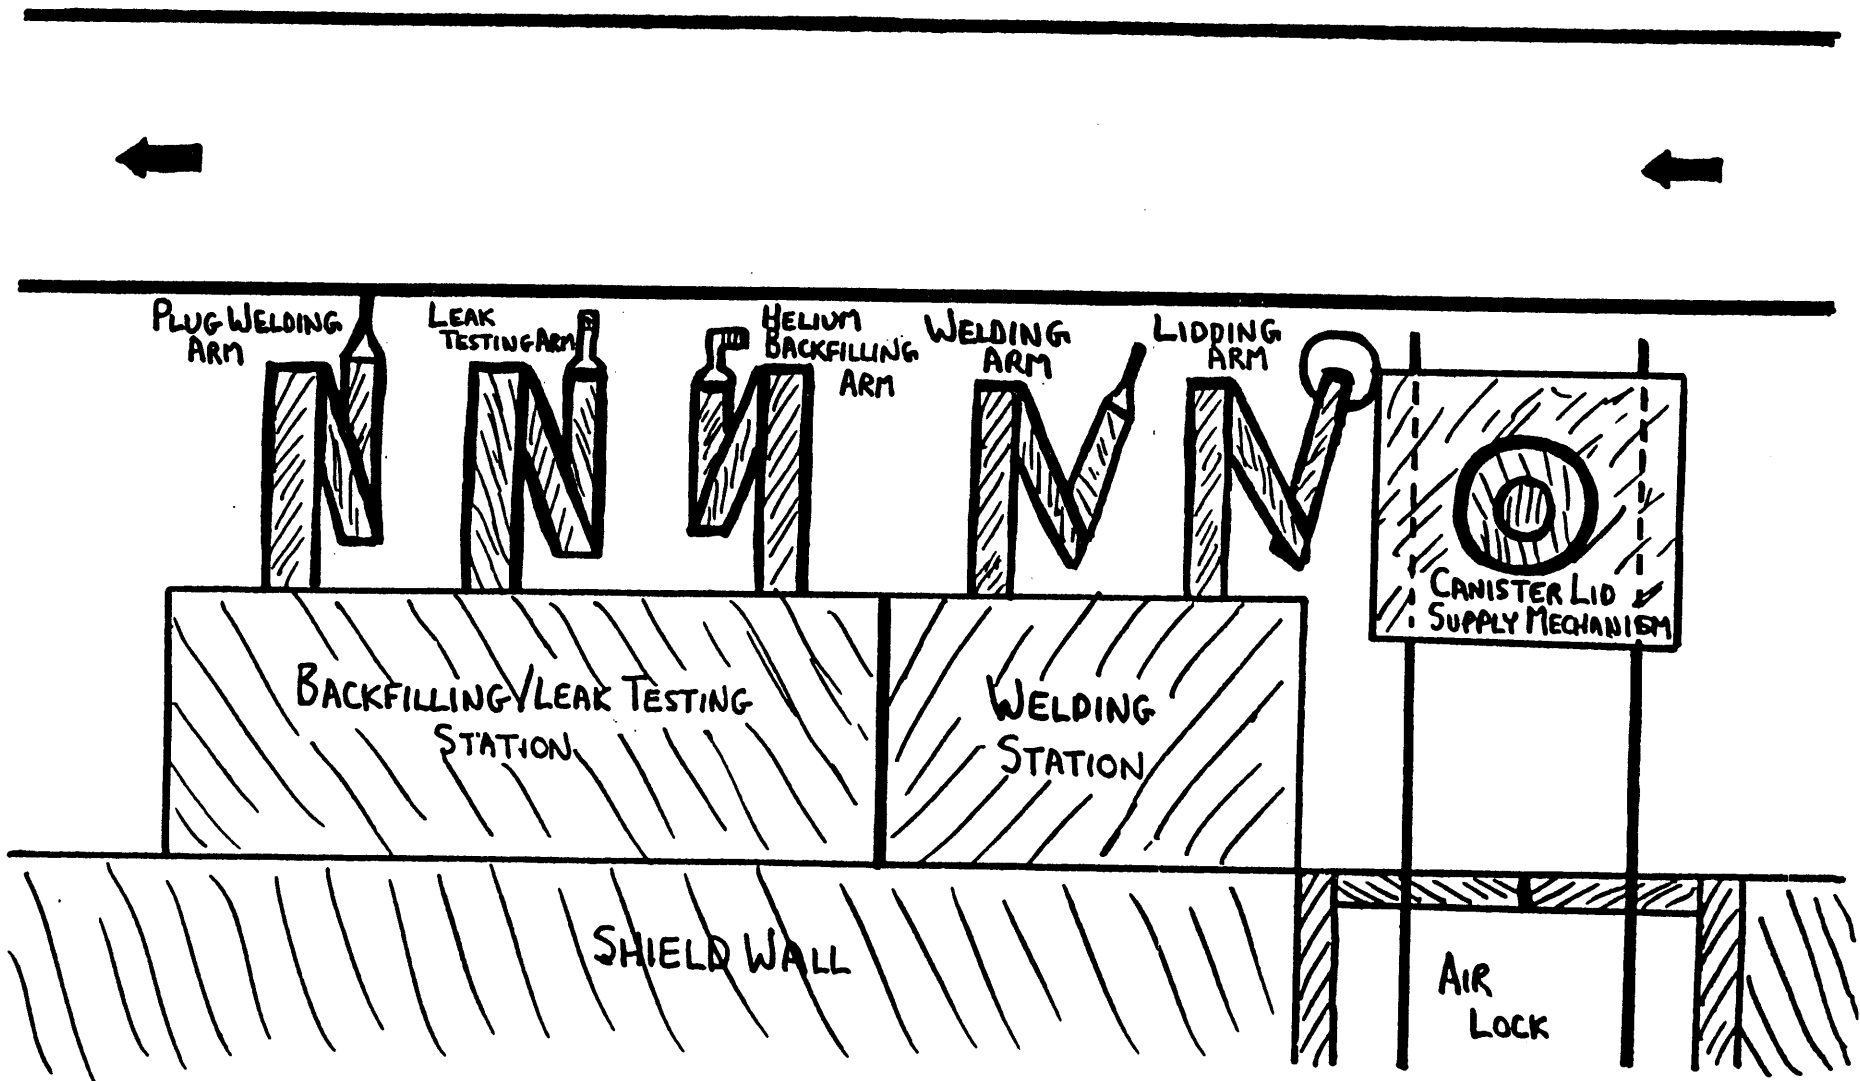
Welding and Backfilling/Leak Testing Stations
